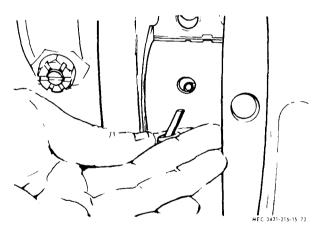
Removing upper main bearing shells, crankshaft not removed.
